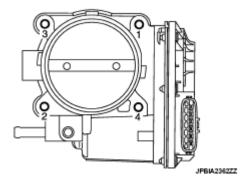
Electric Throttle Control Actuator Mounting Bolts Tightening Sequence
